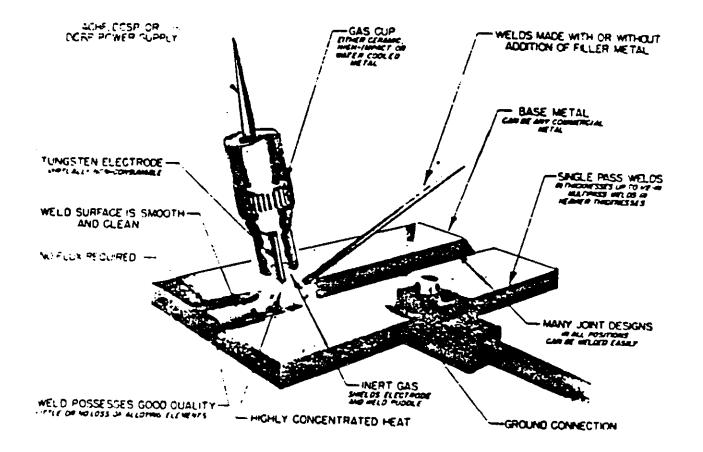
GAS TUNGSTEN ARC WELDING
